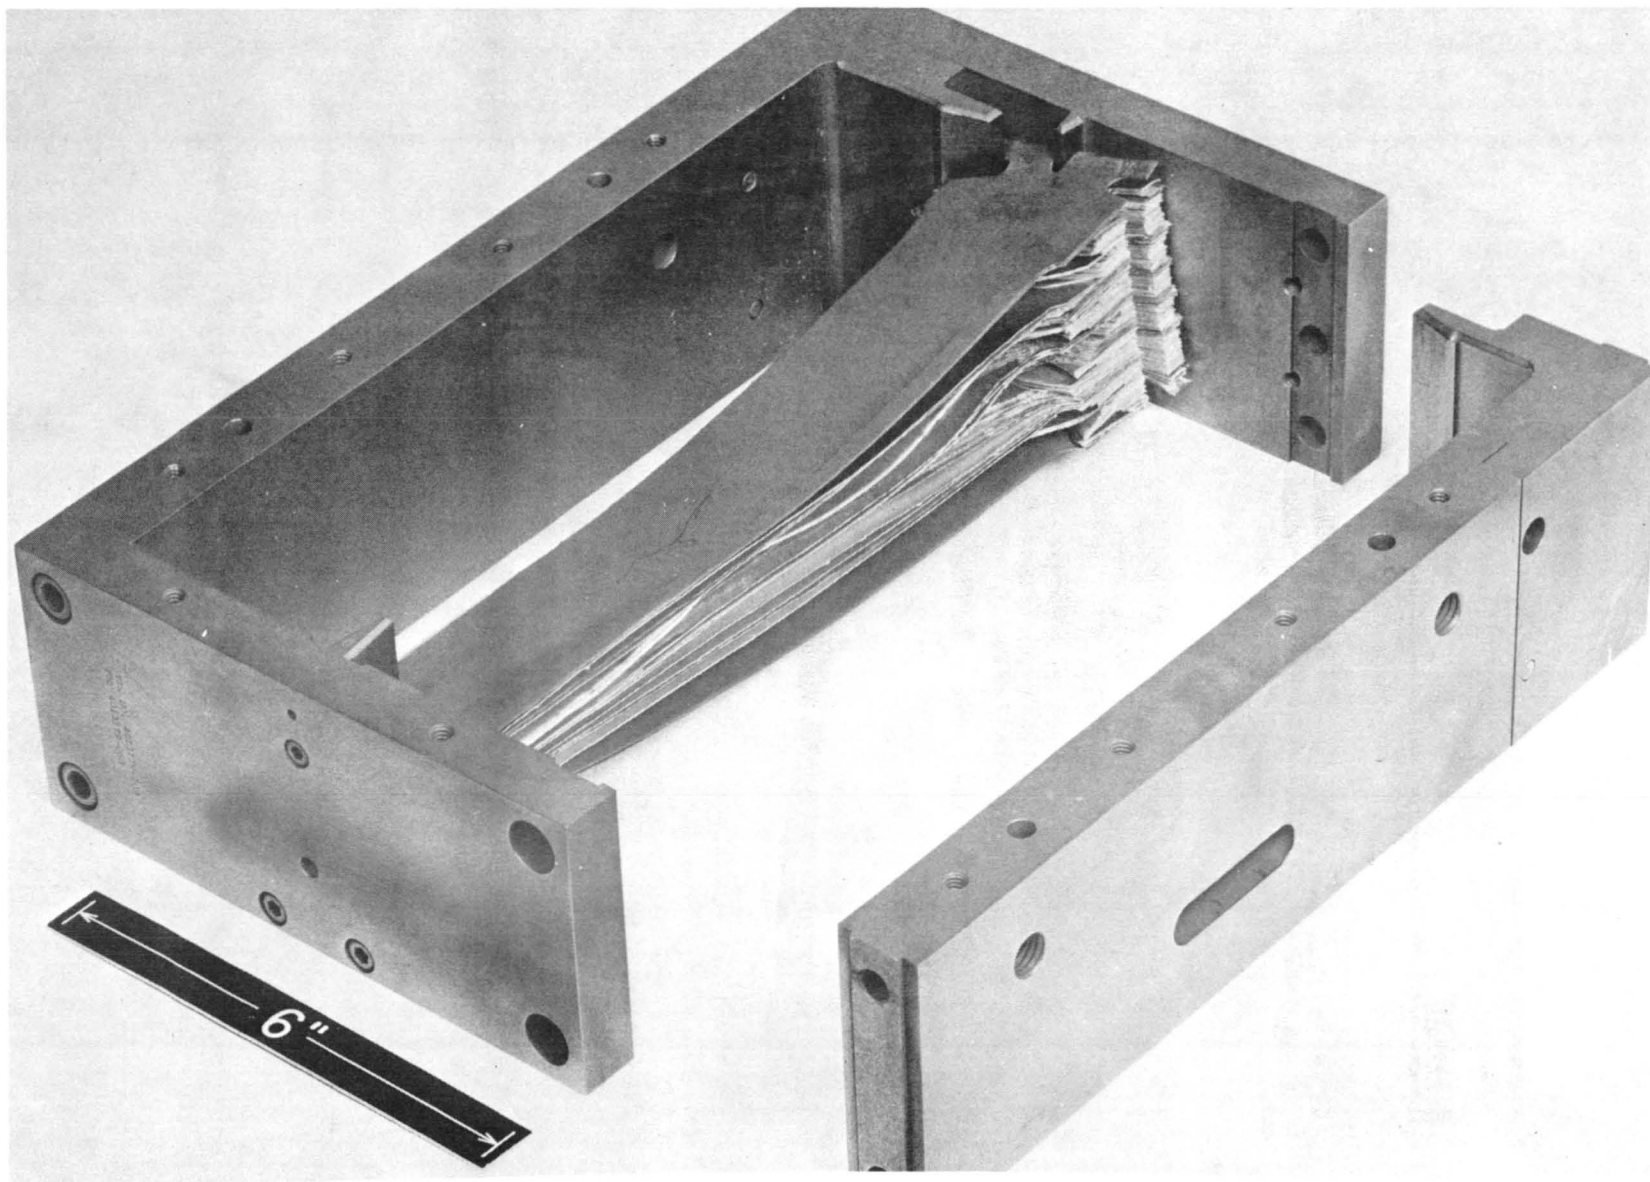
Plies Assembled in the Shuttle Box with One Side Removed to Observe Ply Stacking Arrangement.
